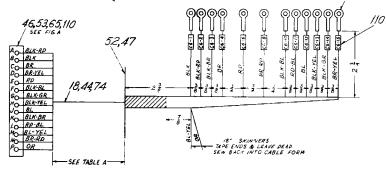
Indicato Equipment AN/APQ-58—Cord Assemblies and Fabrication Methods
